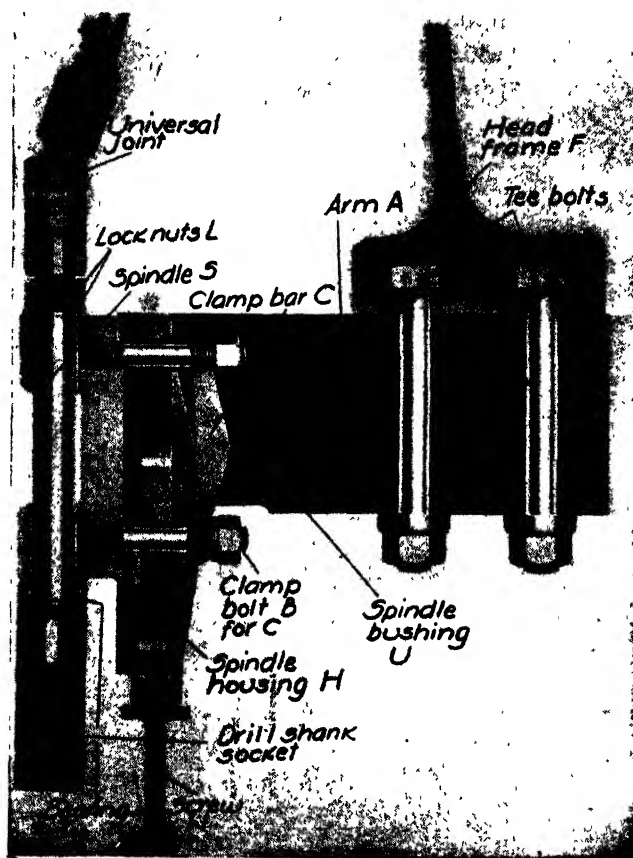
Construction of Spindle and Arm of Adjustable Multiple-spindle Drilling Machine Head.
